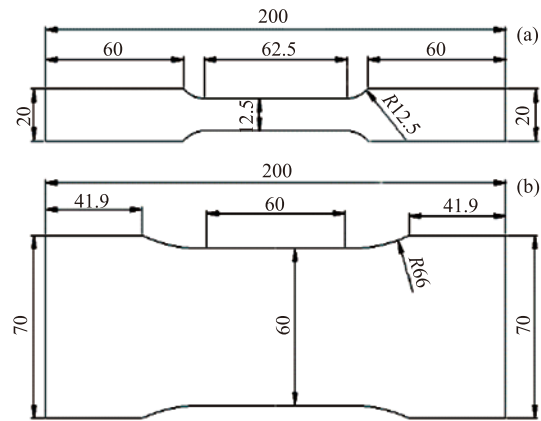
Geometric illustration of specimens used in tensile tests: (a) with standard gauge; (b) with wide gauge (in mm)
